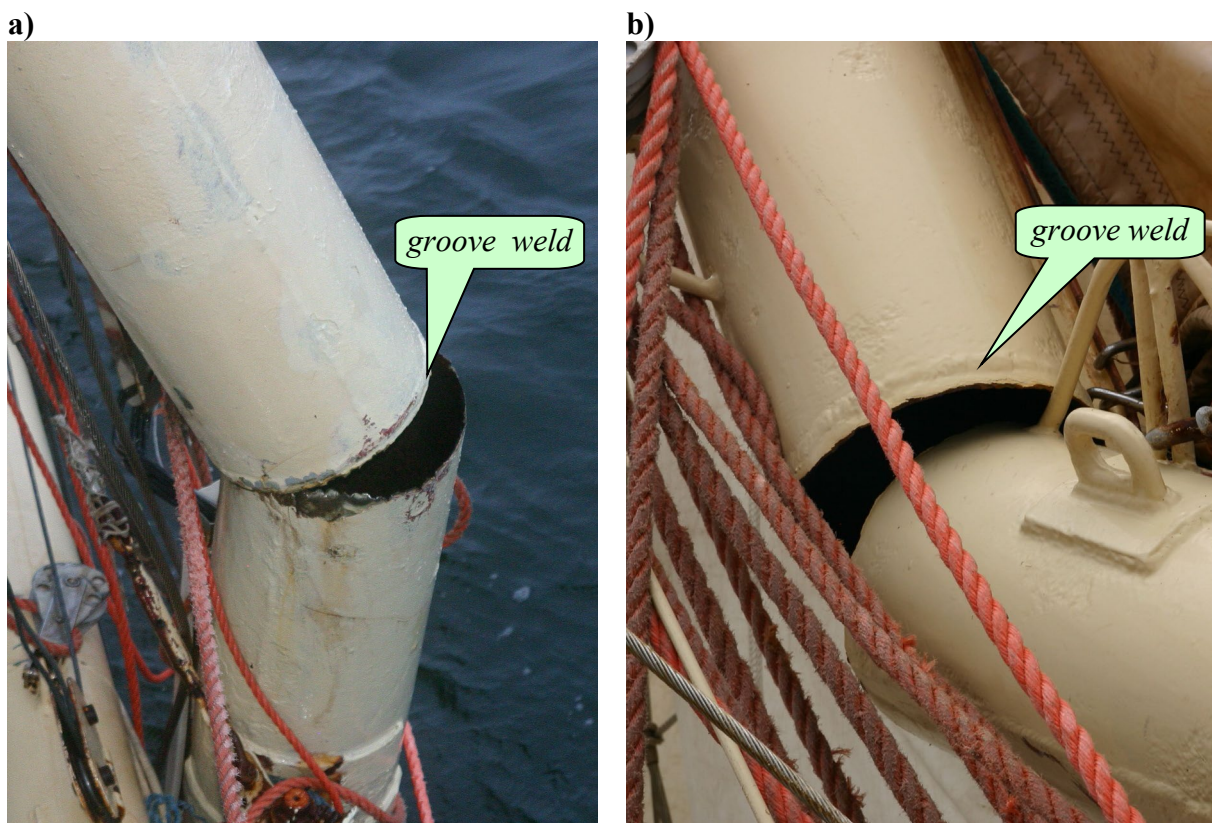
Fracture examples of with marked butt welds: a) the foremast; b) mainmast.
